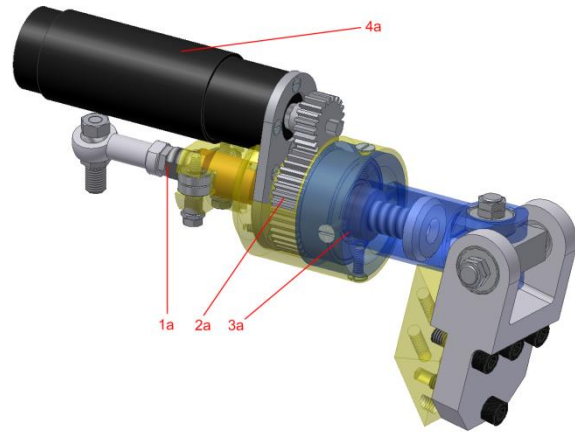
Bodies of the linear actuator (by Houška, P.)
